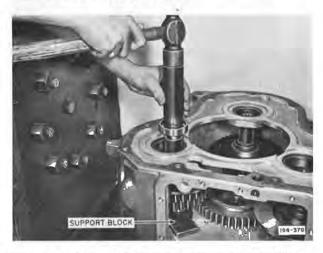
Installing Compound Countershaft Rear Ball Bearings
